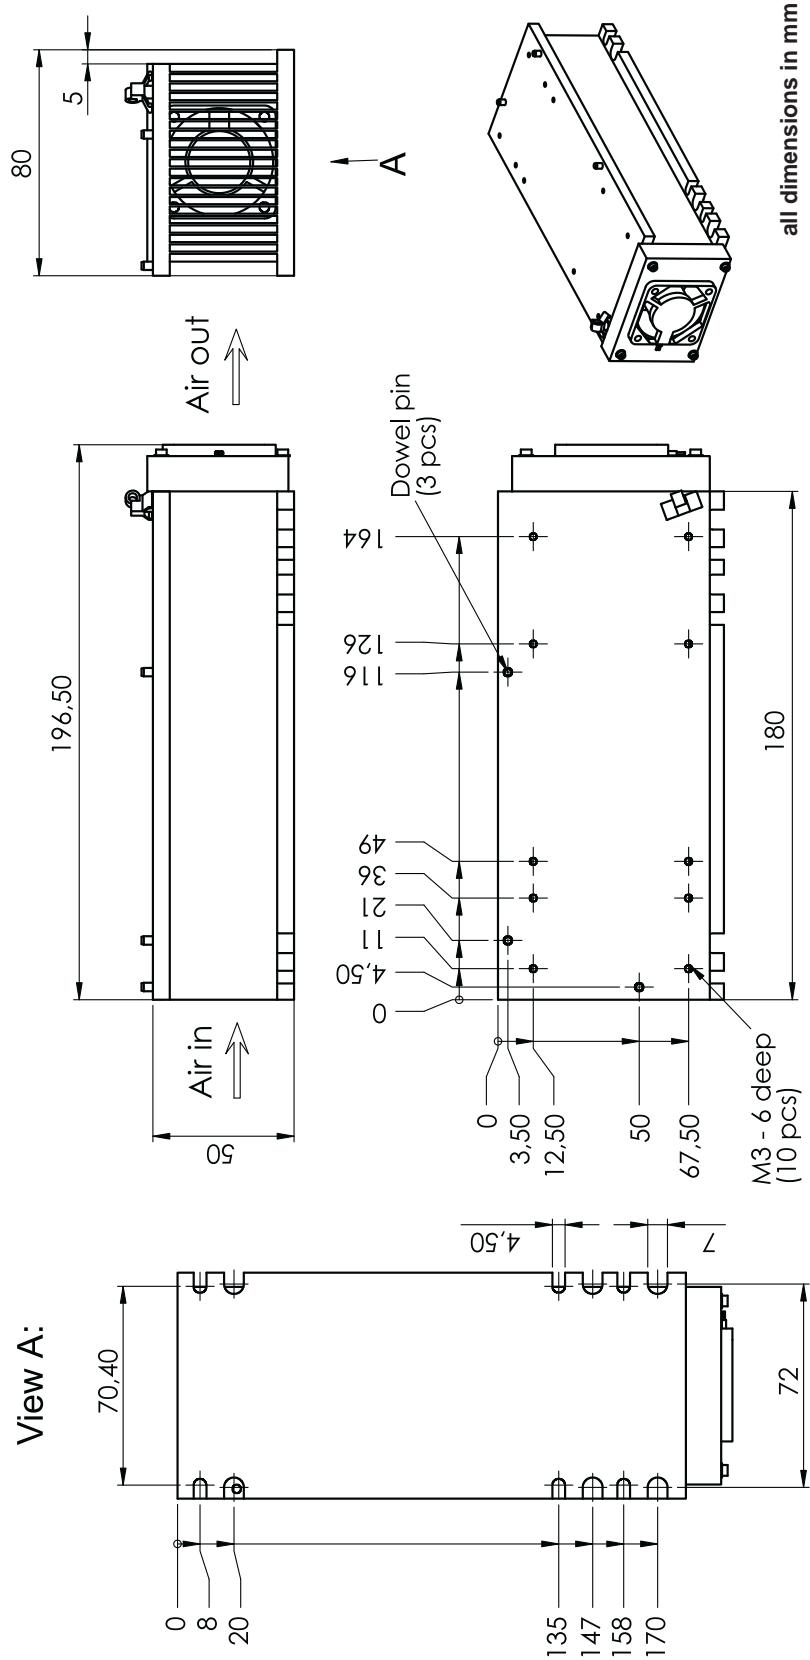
Optional Heatsink for Laser Head Dimensions
